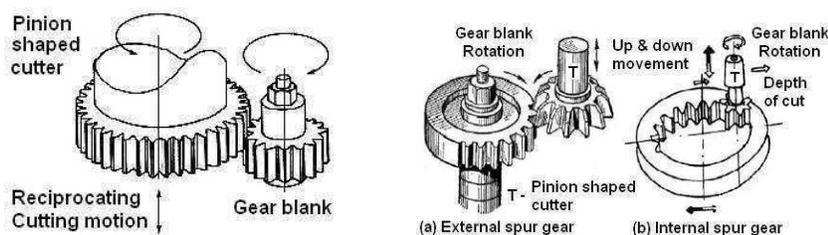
Setup of gear teeth generation by gear shaping operation with a pinion-shaped cutter
